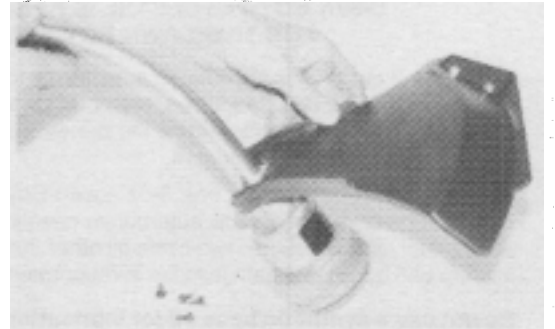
Insert guard onto steel tube above clamp assembly as shown.
